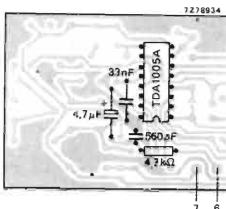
Printed-circuit board component side, showing component layout of Fig. 15.
